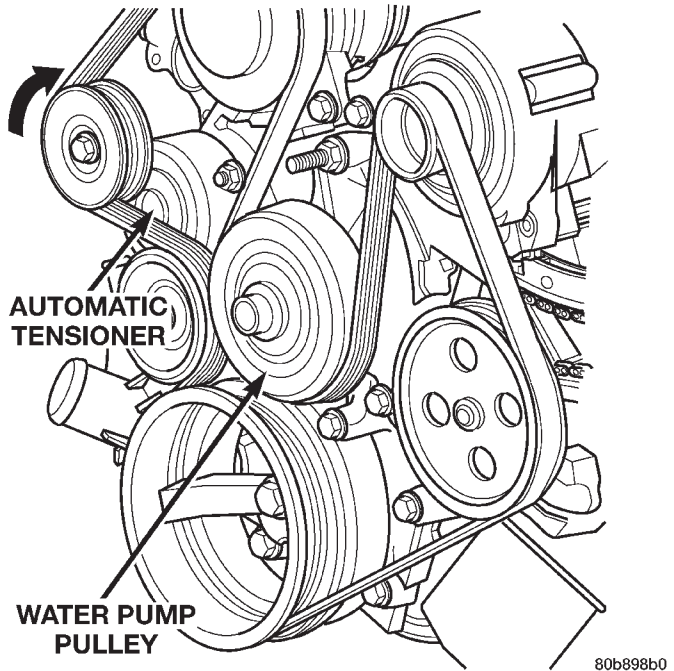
Accessory Drive Belt and Tensioner 4.7L
